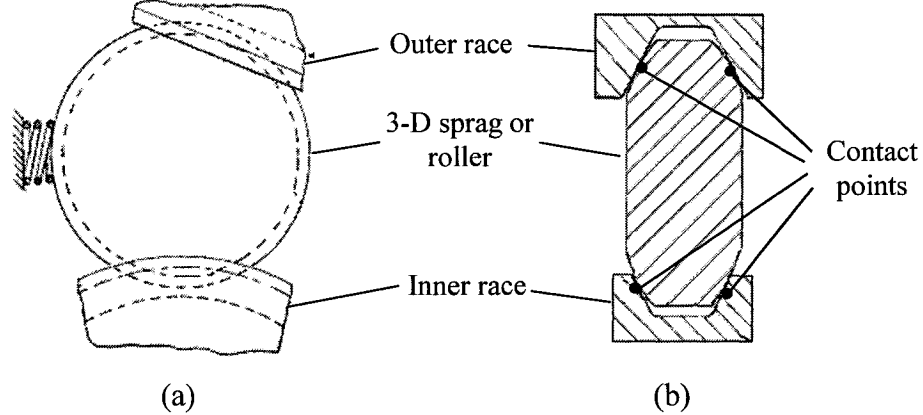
(a) A side view of a roller in a roller-clutch with 3-D sprag geometry; (b) a front view of the modified roller and races reveals four point contacts between the roller and the races (adapted from [46]).
